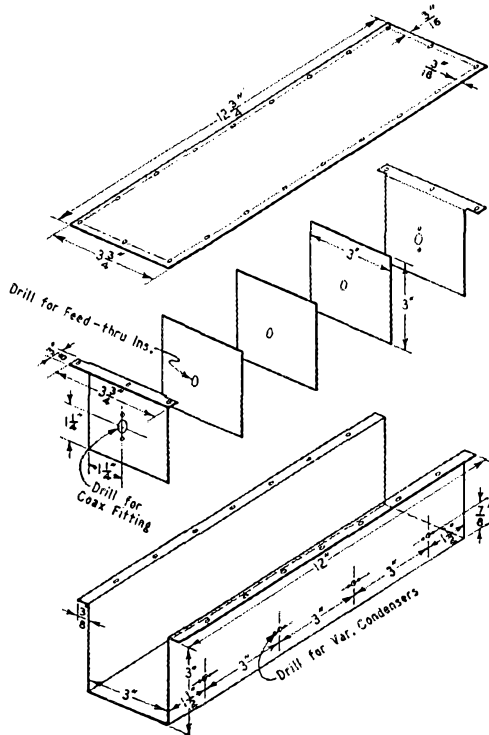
Sketch showing construction and assembly details of the enclosure for the high-power low-pass filter.
